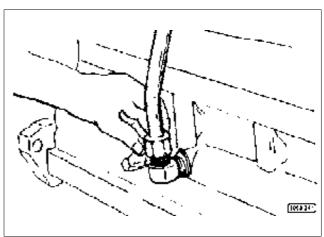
On turbocharged engines: connect the turbocharger oil delivery and return pipes;
